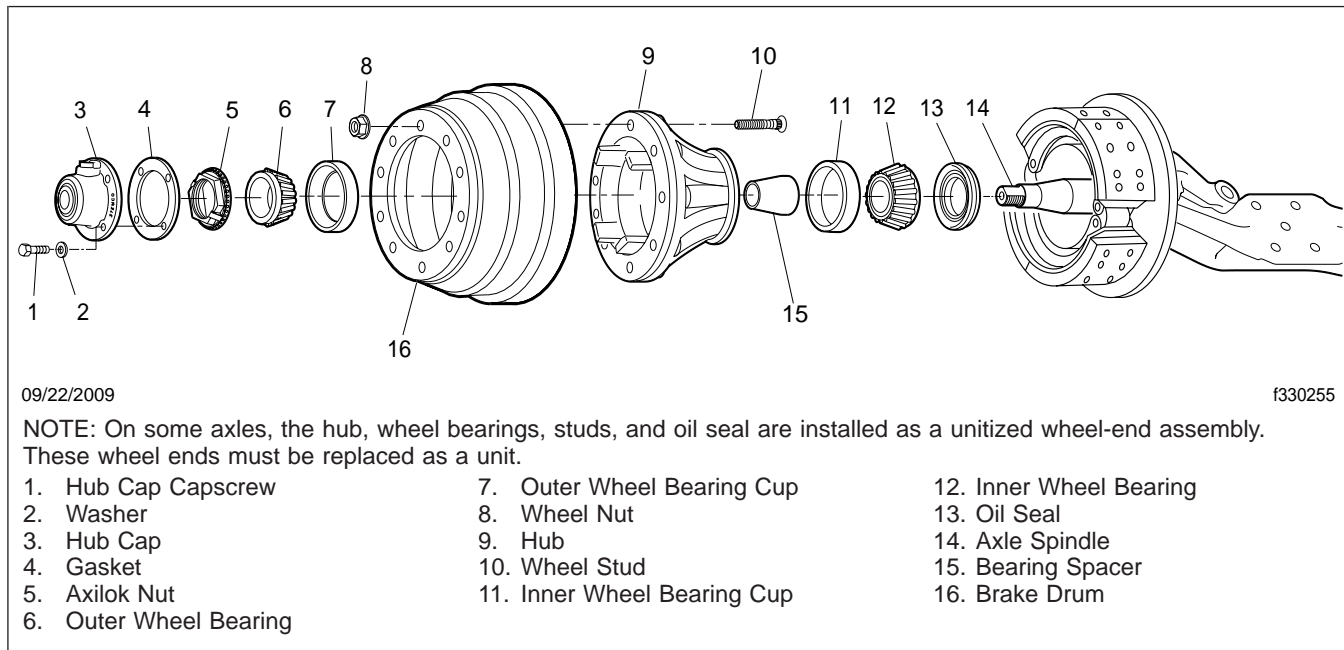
, Typical Wheel End Assembly, Front Axle with Drum Brakes
